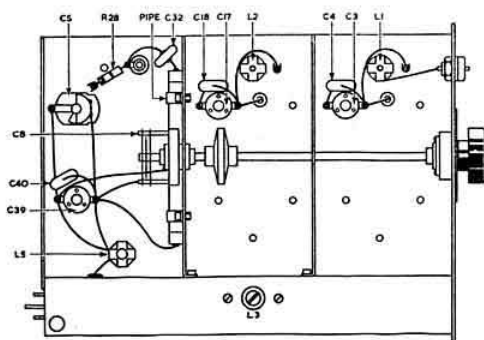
A side view of the converter showing the arrangement of the main components.
